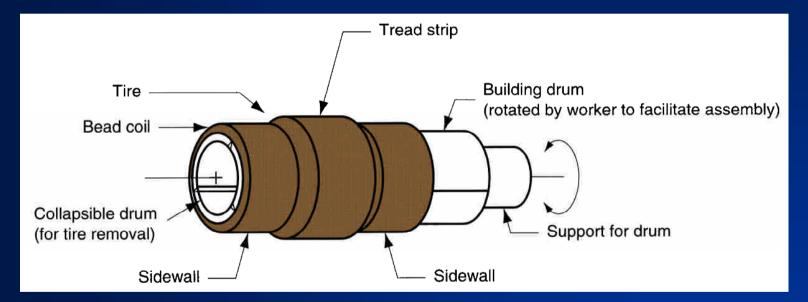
Tire just before removal from building drum, but prior to molding and curing
